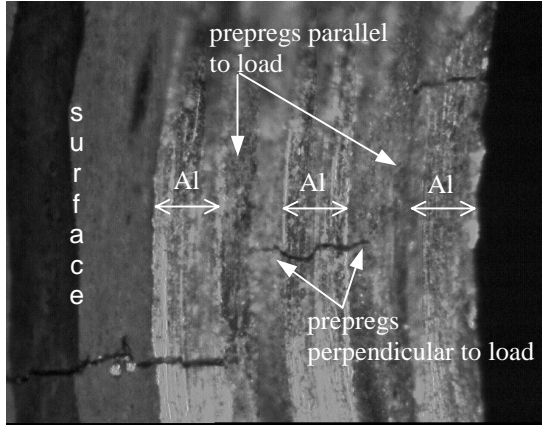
View into GLARE3 drilled hole, fatigue cracks in all aluminium layers and the prepregs with fibers orientated perpendicular to the load direction
